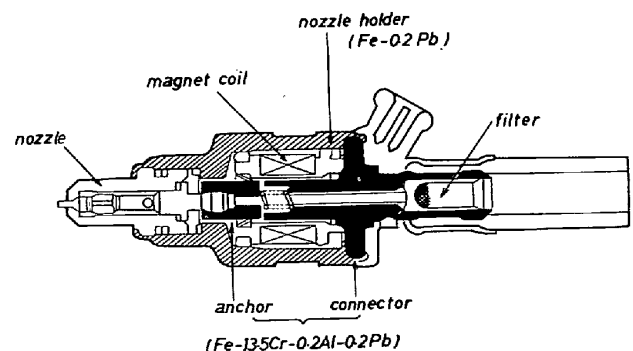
Free-machining soft magnetic materials used for a fuel injection pump.
